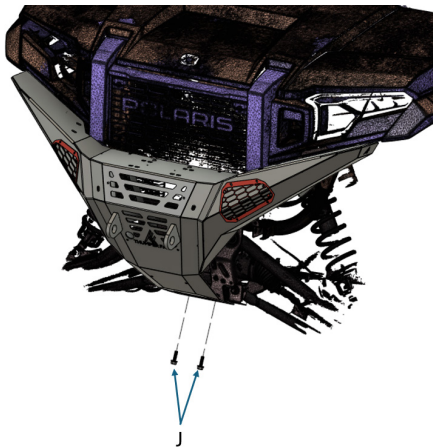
Mount Bumper Body to vehicle using a 15mm Socket. Do not fully tighten
